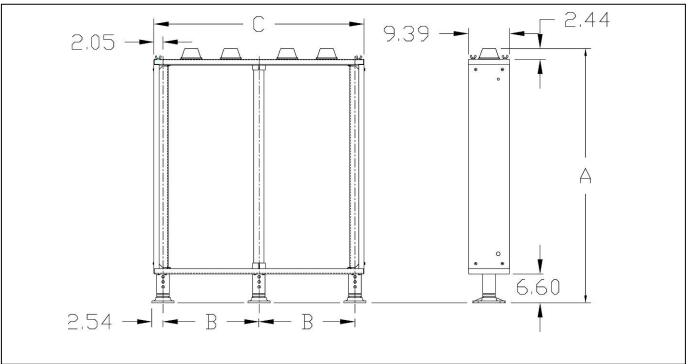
L-858 Sign Dimensions (Size 4/One-Module)
